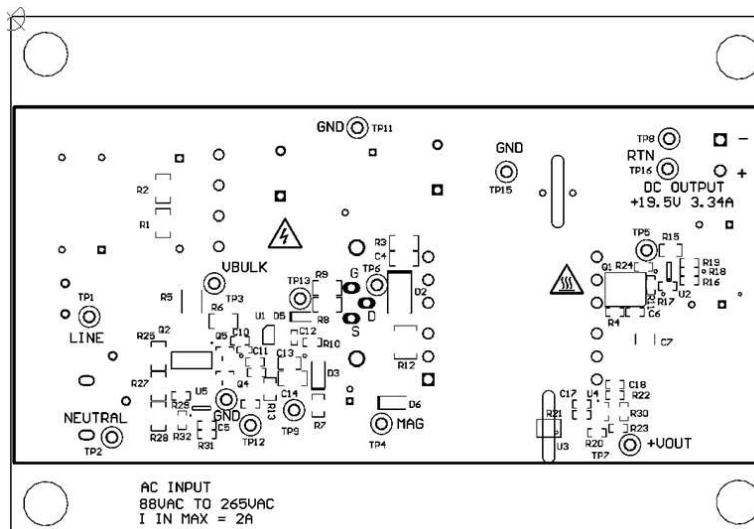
UCC24630EVM-636 Bottom Layer Assembly Drawing
